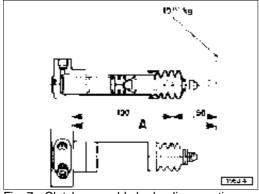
Clutch assembly hydraulic operating cylinder.
